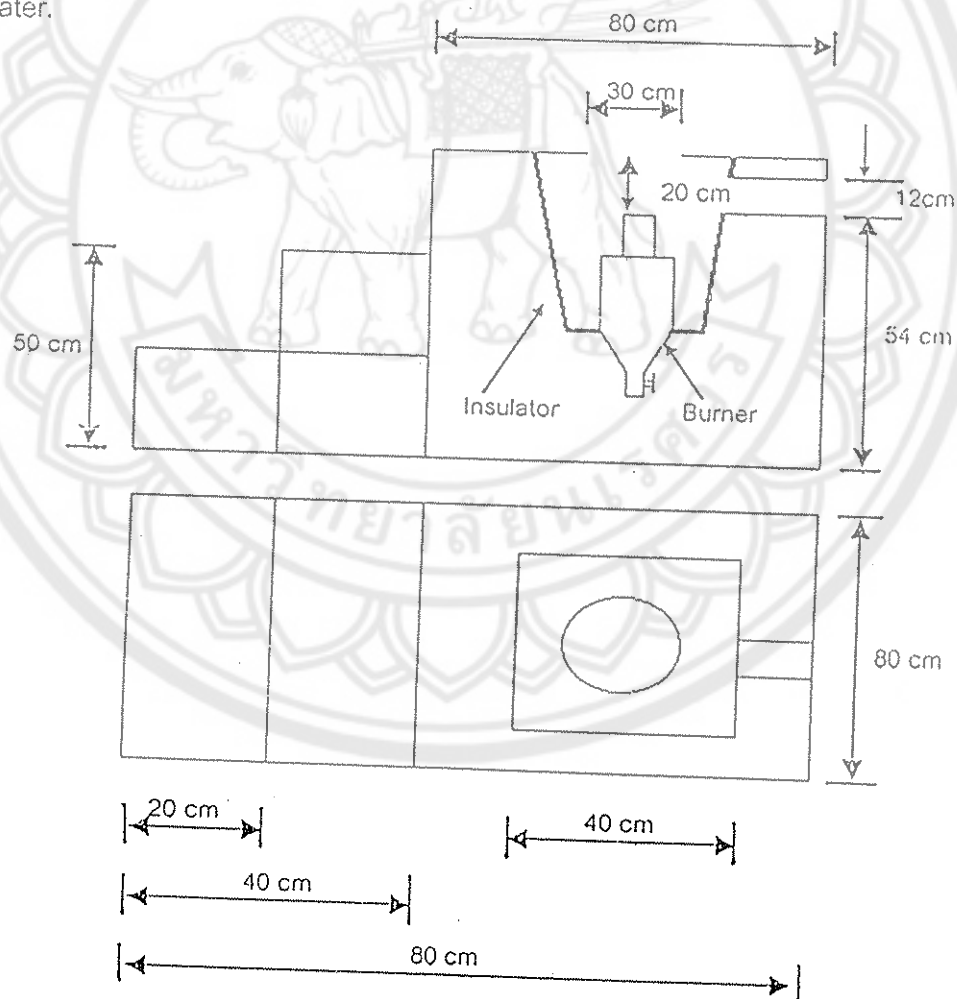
Dimension of Sterilize and Pasteurize Combustion Chamber
